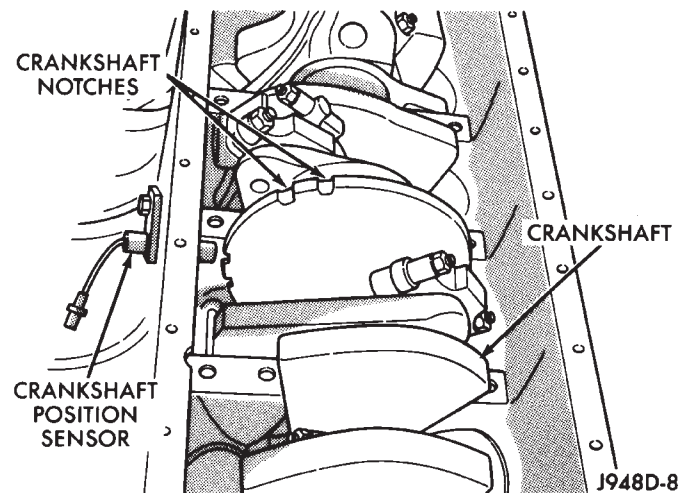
Crankshaft Position Sensor Operation—8.0L V-10 Engine
